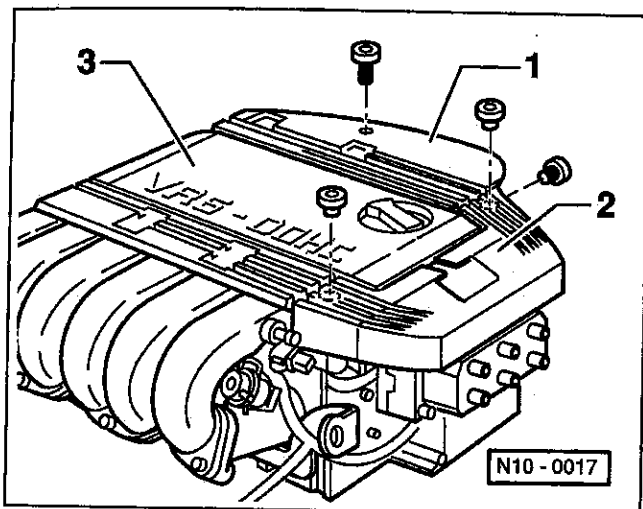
Spark plug wire guides (1 and 2). Intake manifold cover shown at 3.
